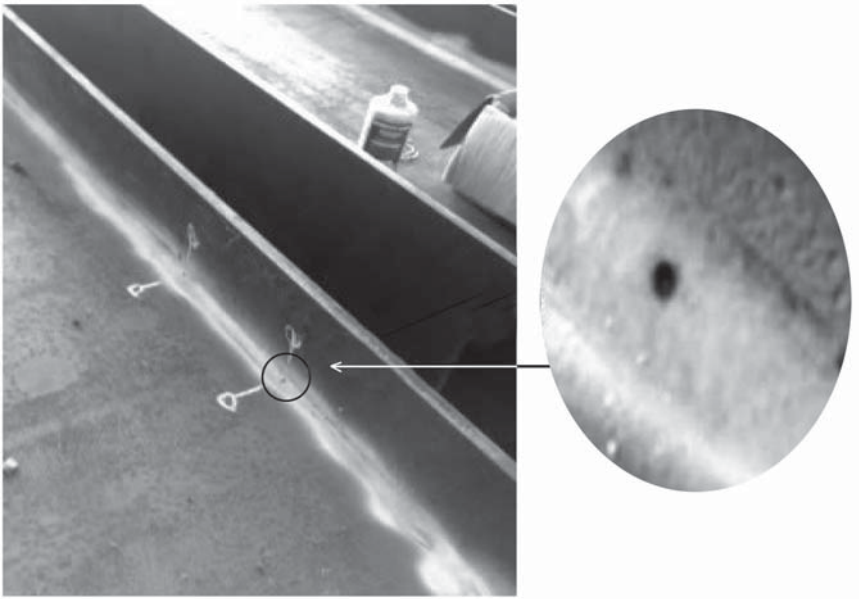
(a): Defect found during DPT testing of welded joint
